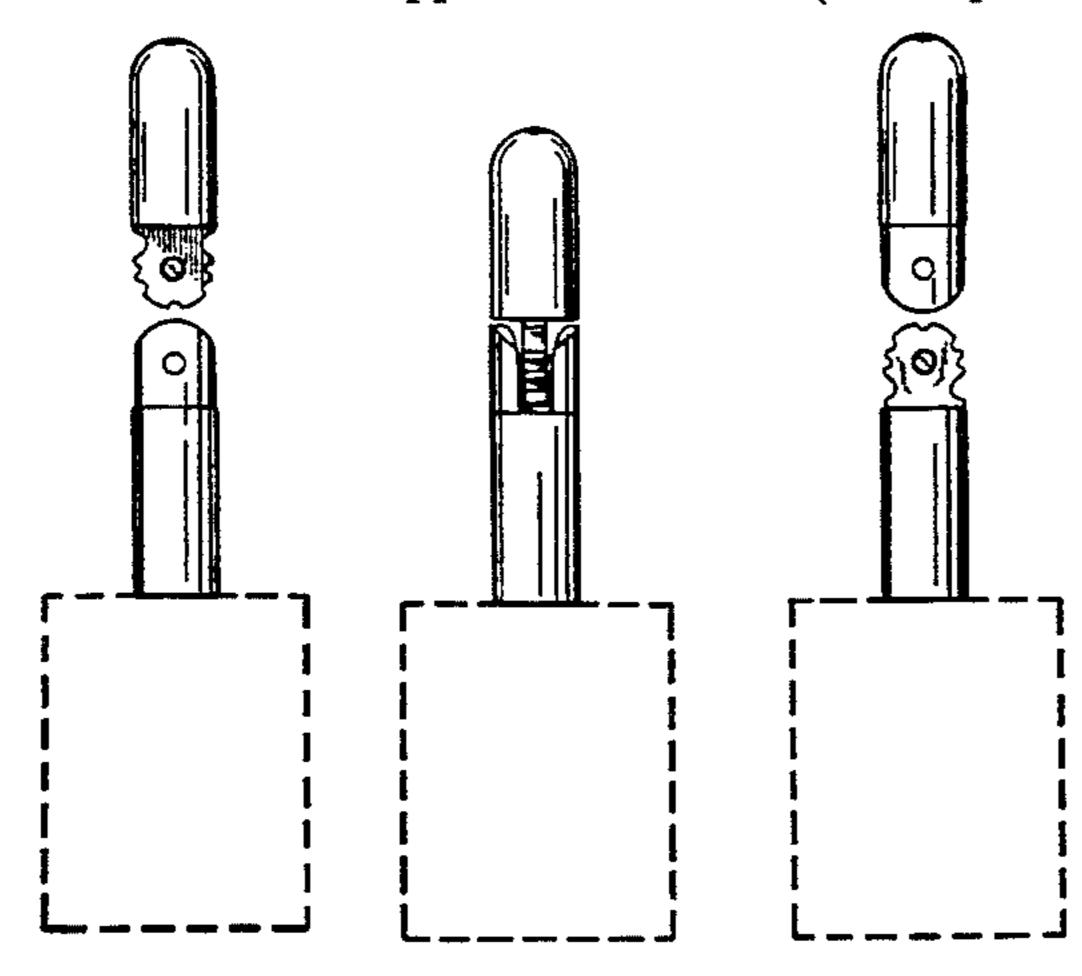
is a front elevational view of FIG. 20, its rear view being the same;
